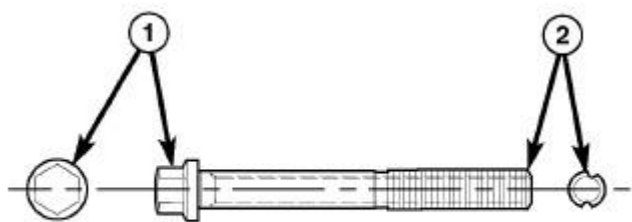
WHEEL ALIGNMENT ADJUSTMENT BOLT
